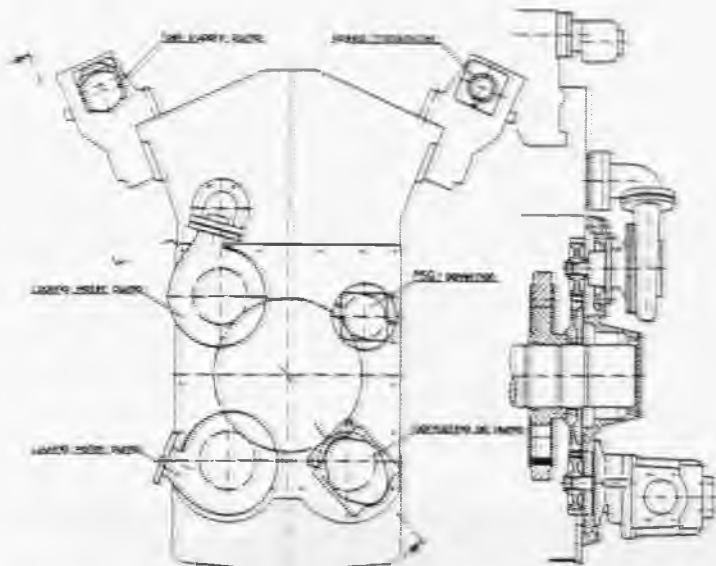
Drive of supply pumps, governor and measuring units on the V 20/27 engine.
